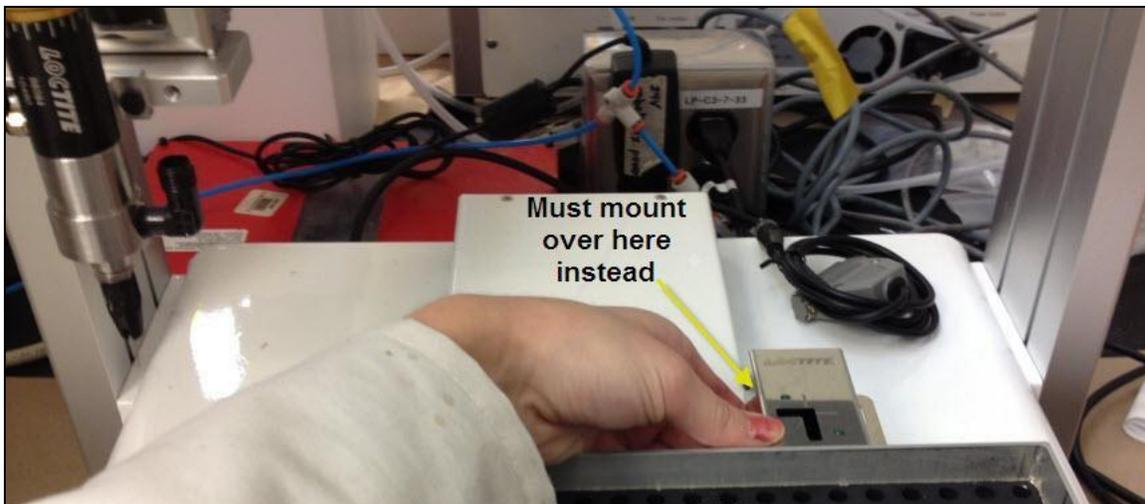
An aluminum plate was machined to mount the calibrator underneath the top of the fixture. This is because the calibrator doesn't have a connector panel anywhere but the right side.
